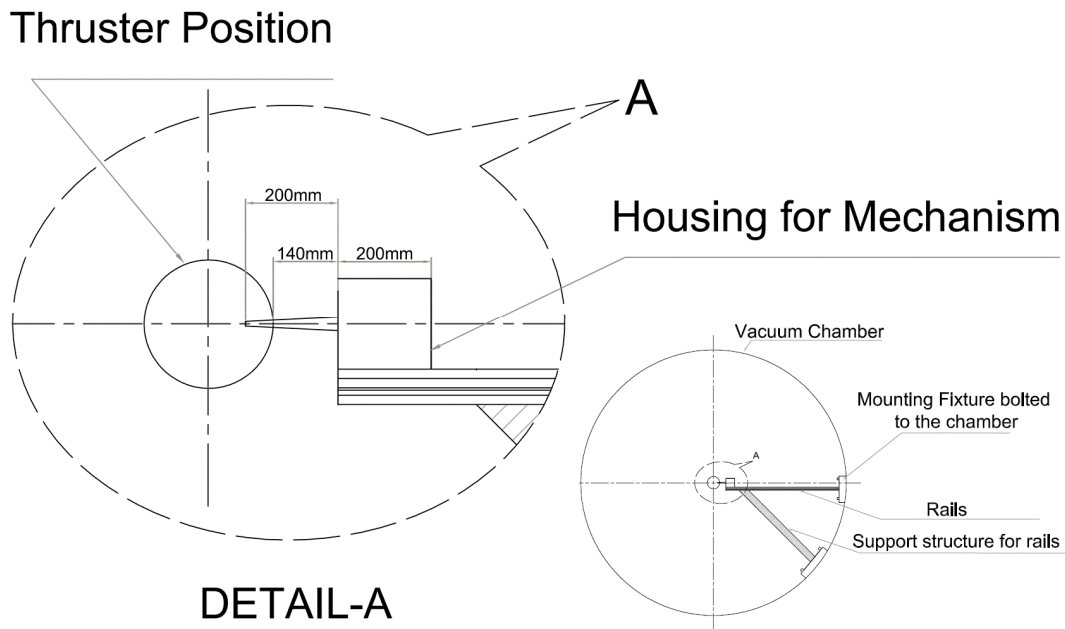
End View ( from the beam dump side of the main chamber) of the mechanism mounted on rails with approximate dimensions
